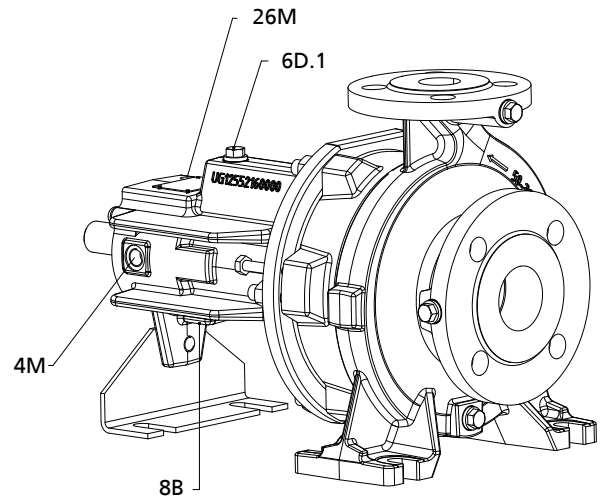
Connections for double mechanical seal and monitoring equipment
